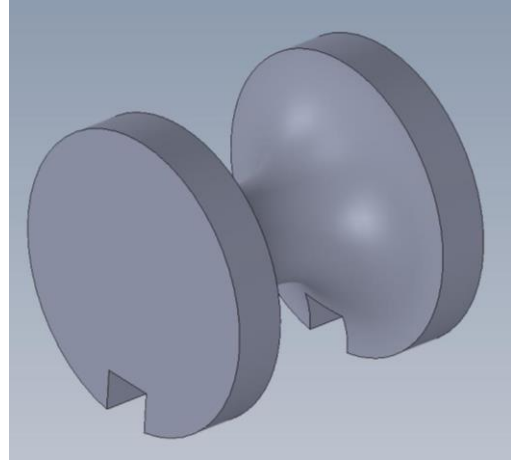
CAD Drawing for "Anvil" Support for M32 Bars
